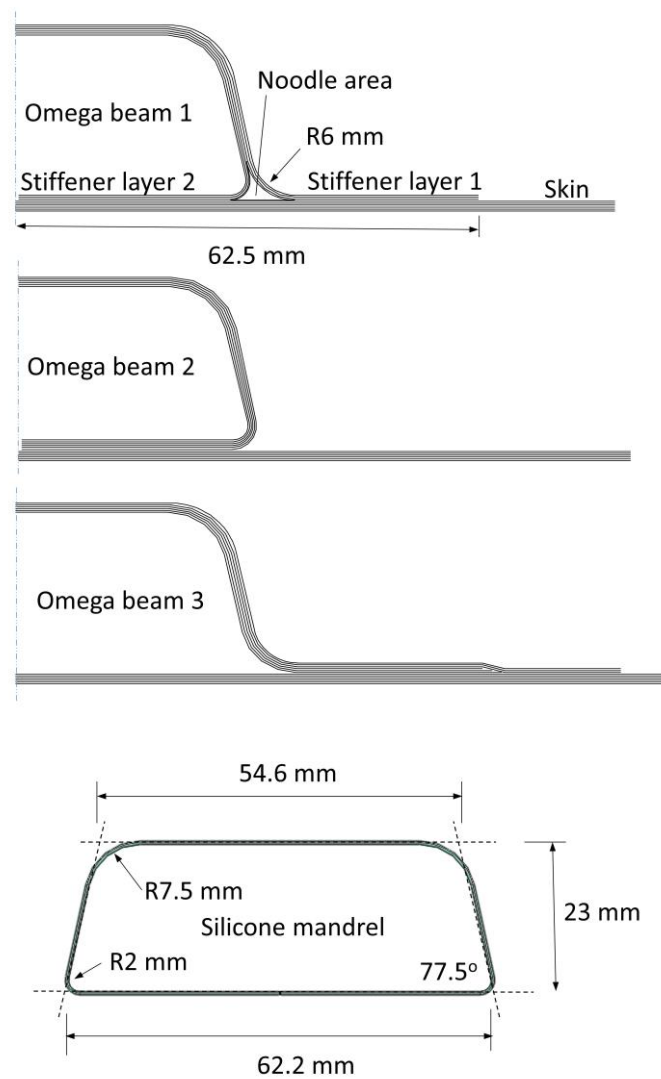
Lay-up designs and feature dimensions for manufacturing Omega beam 1, 2 and 3
